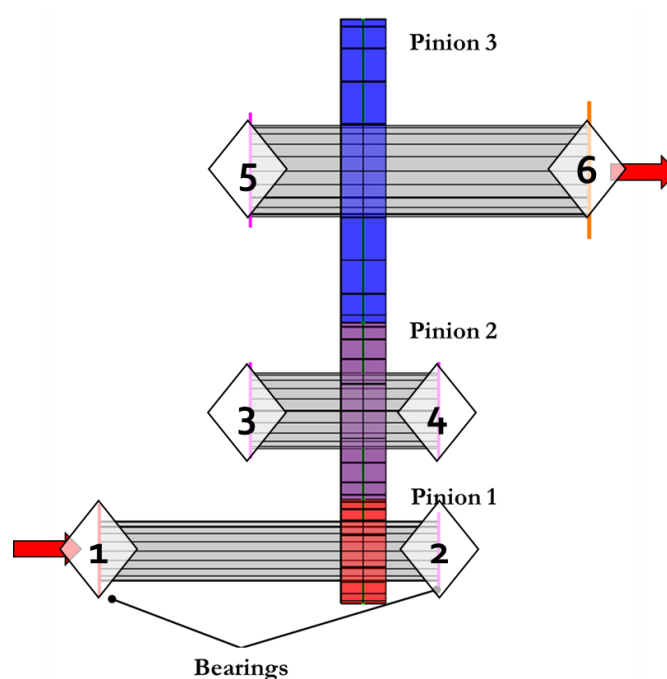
Double-stage spur gear system with idler gear – Bearing elements numbering
